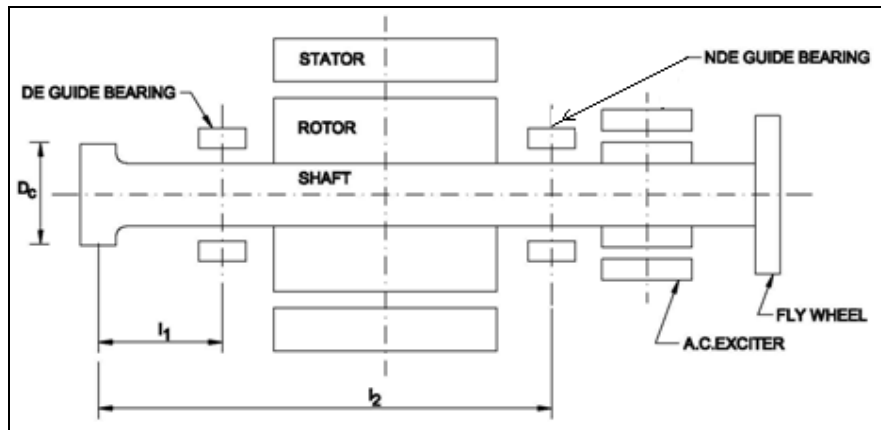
Horizontal Shaft Generator Bearing Arrangement
